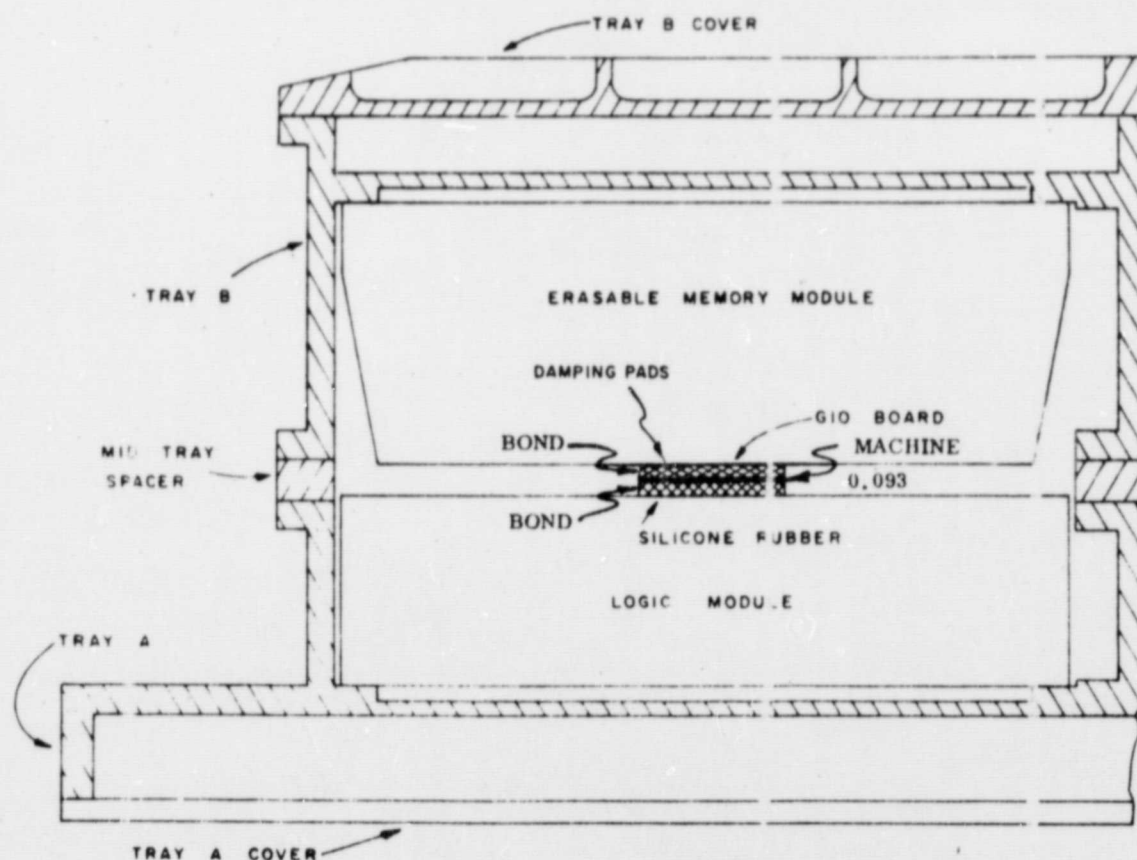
AGC Cutaway Showing Damping Pads Between Modules
